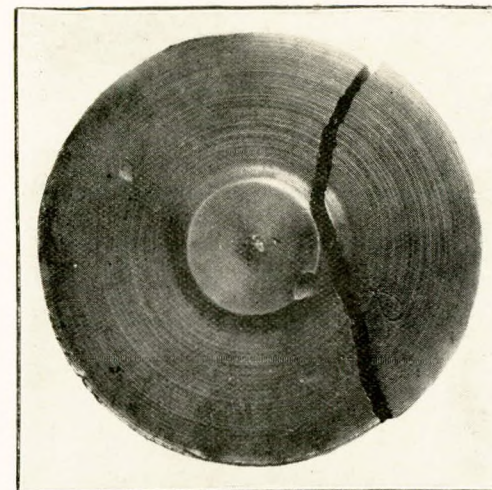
End view of  $2\frac{1}{8}$ " bar. Full size.
